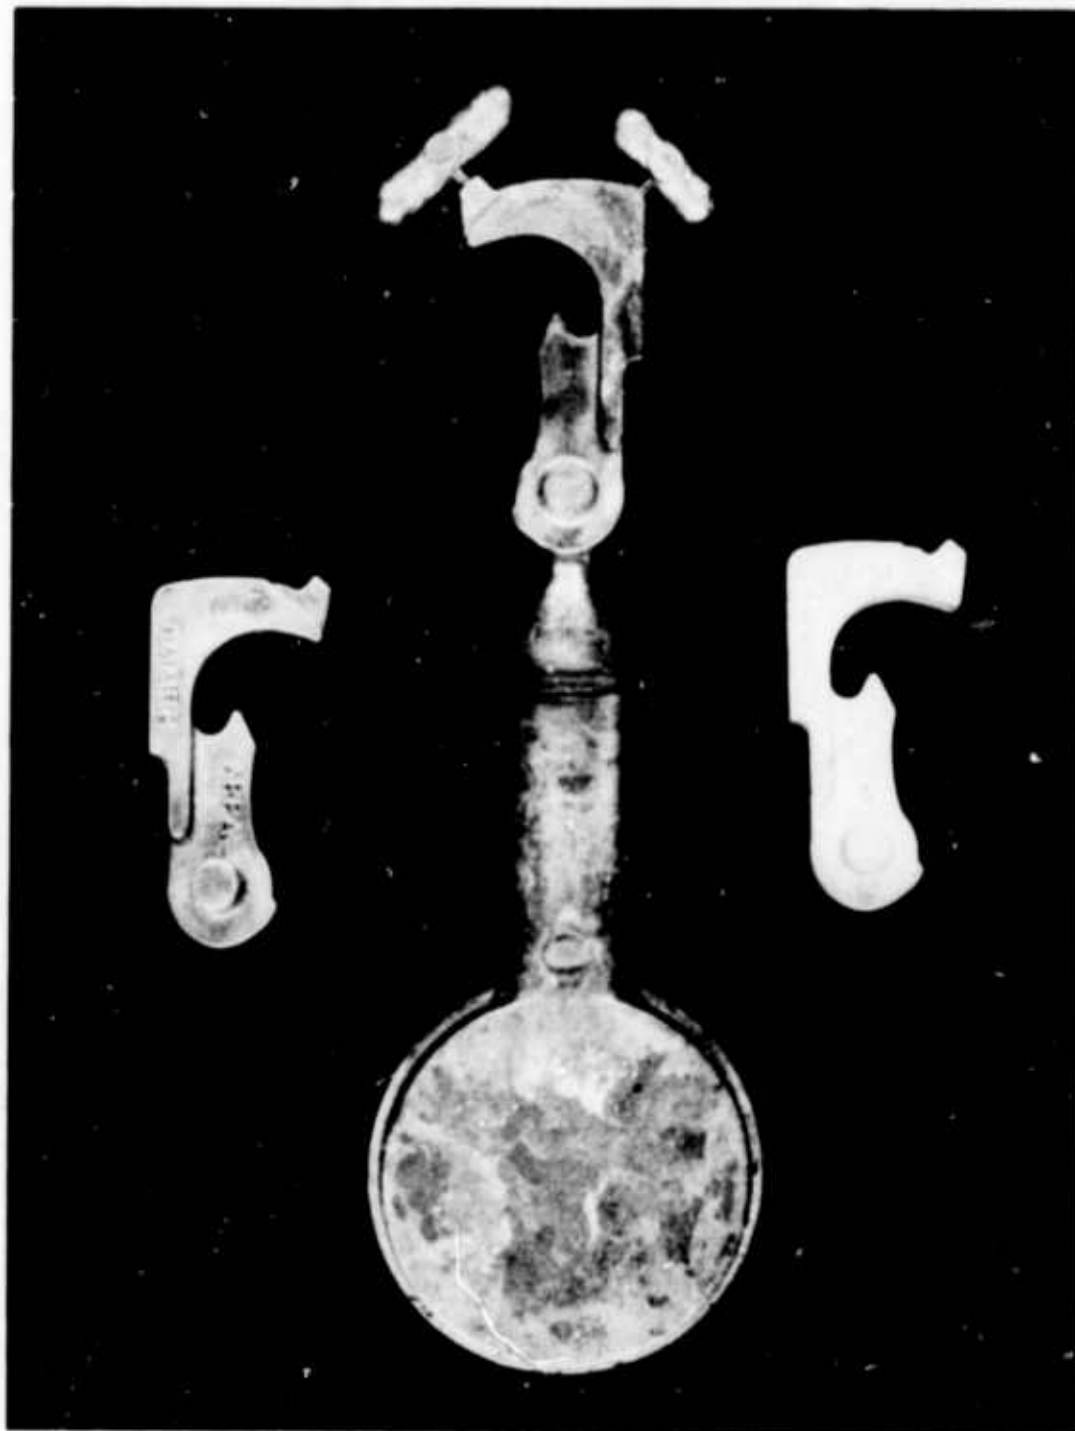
Examples of typical castings in various stages of finishing produced by Thixocasting. 1X.
